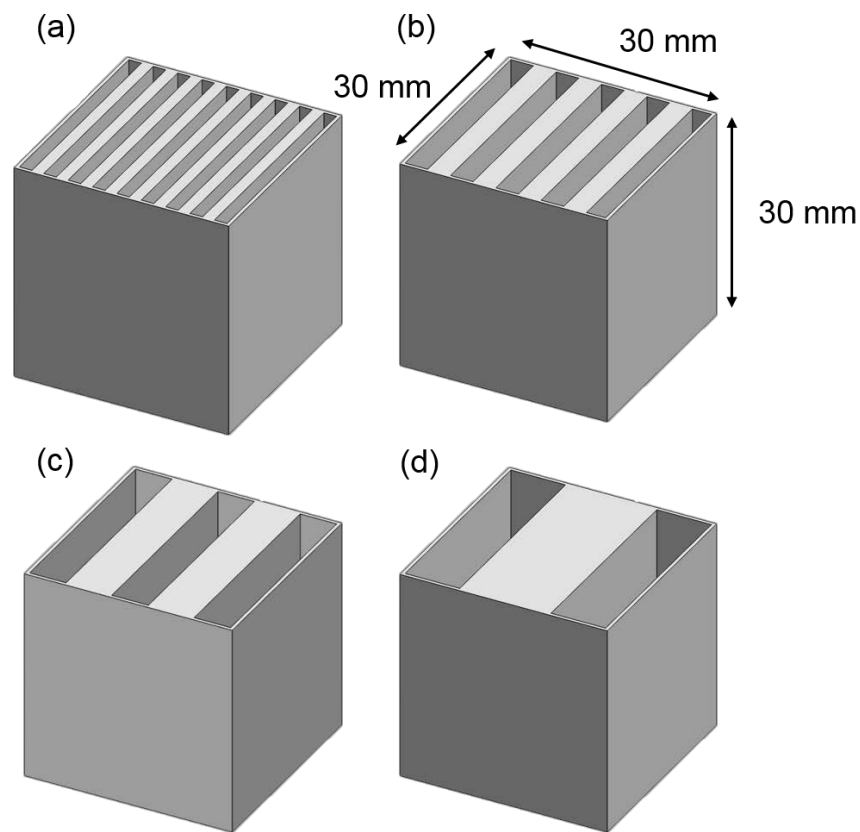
Scaffolds designed by (a) 8 walls, (b) 4 walls, (c) 2 walls and (d) 1 wall.
